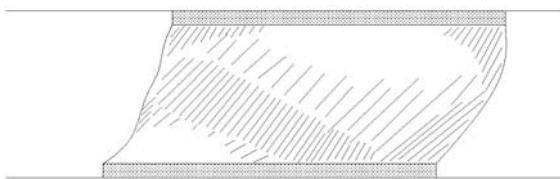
Starved solder joint of PBGA driven by solder filling up the “via in pad”
